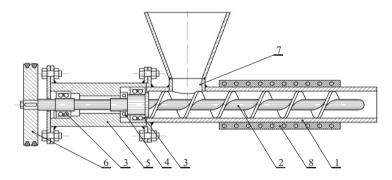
Scheme of working system of compacting machine with perpetual screw: 1 – forming cylinder, 2 – perpetual screw, 3 – radial bearings, 4 – axial bearings, 5 – housing, 6 – driving belt pulley, 7 – delivery channel, 8 – heater.
